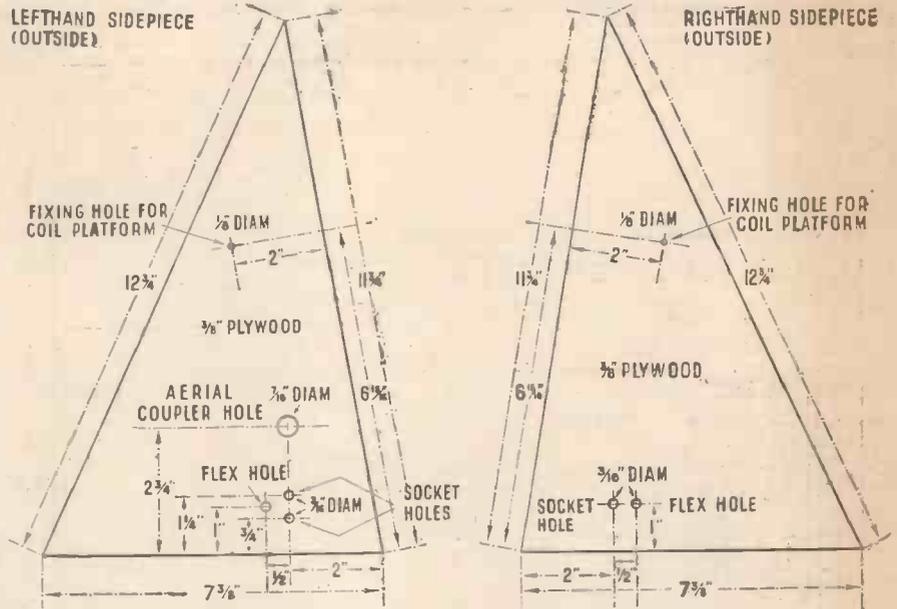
& 4. These two side-pieces support the S.T.900 panel and coil platform. The panel is attached to the 11 1/4-in. sides, and the two side-pieces are both of exactly the same overall dimensions.
